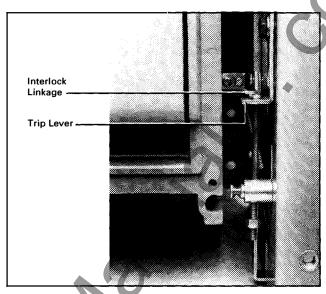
Proper Placement - Interlock Linkage Above Trip Lever (Front View with Dead Front Cover Removed)
